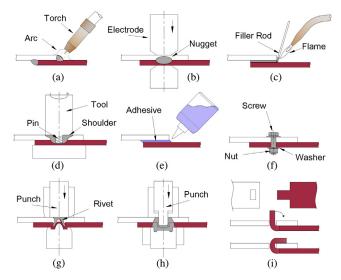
Processes for producing lap joints in sheets or plates: (a) arc welding, (b) resistance welding, (c) brazing (or soldering), (d) friction stir welding, (e) adhesive bonding, (f) fastening (or riveting), (g) self-piercing riveting, (h) clinching and (i) bending of tabs.
